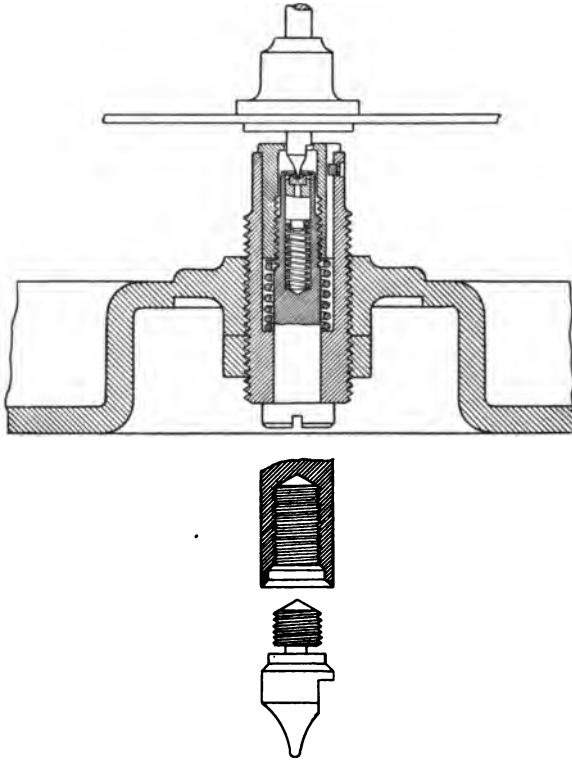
Pivot and Jewel Type of Lower Bearing.
